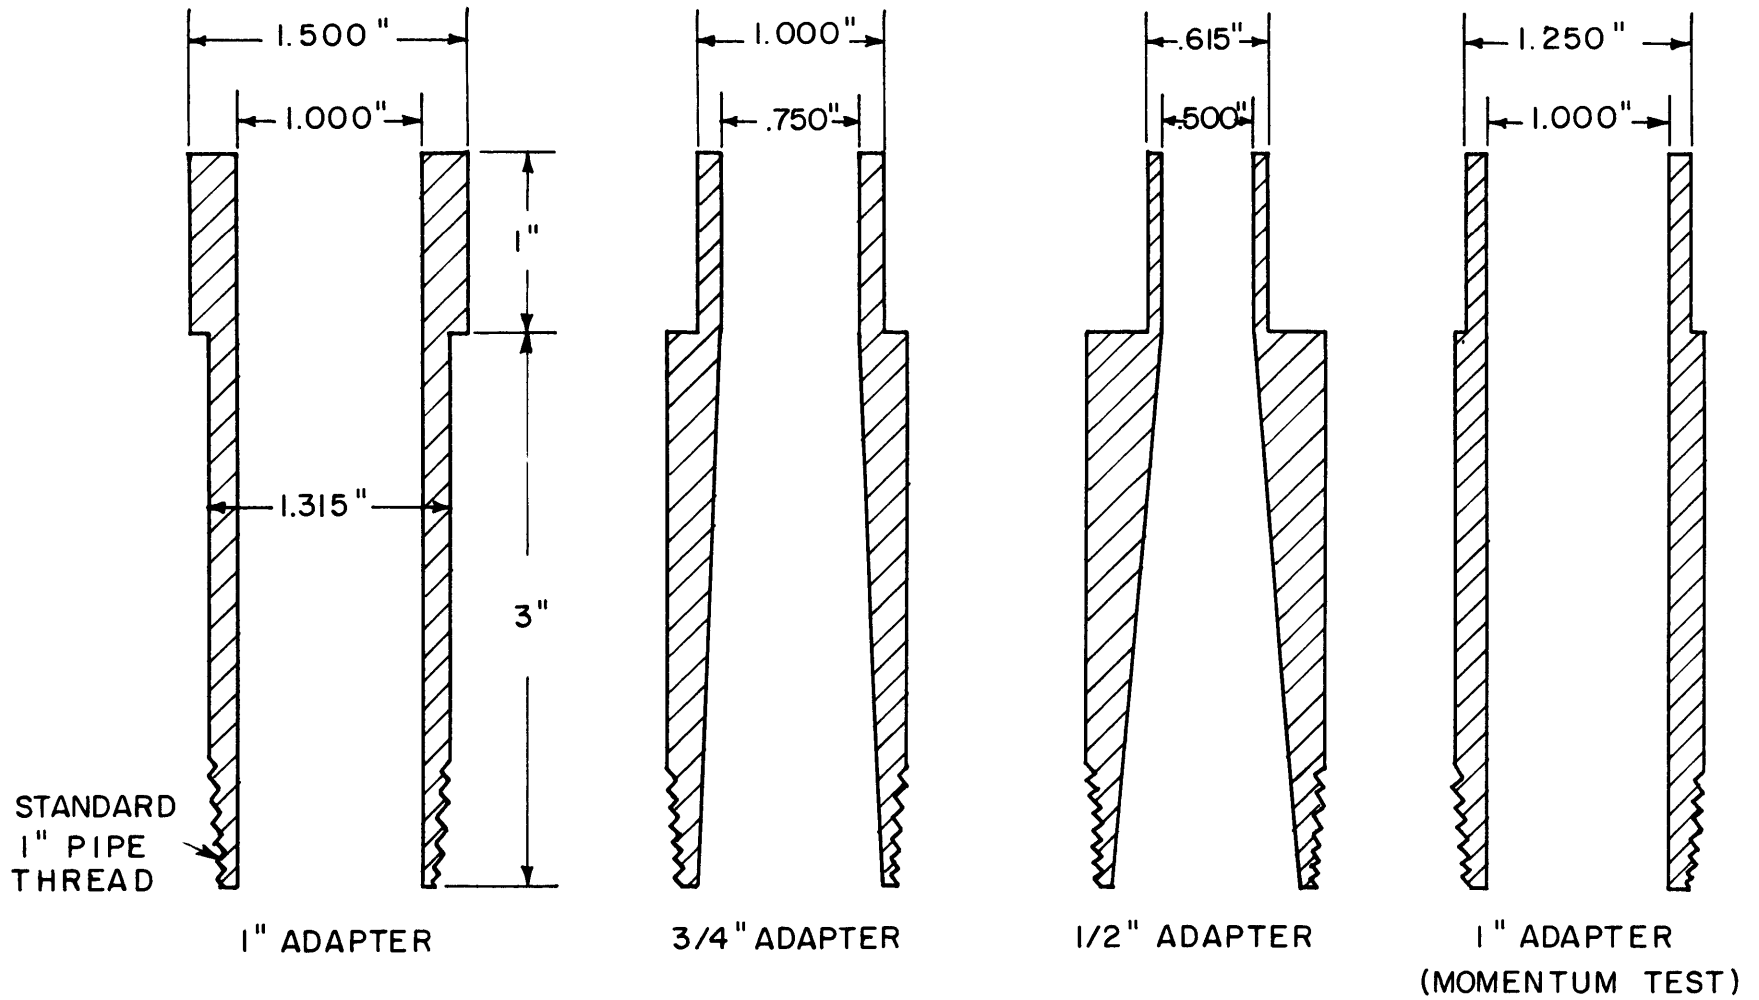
CROSS-SECTIONAL VIEW OF VALVE - TUBE ADAPTERS
